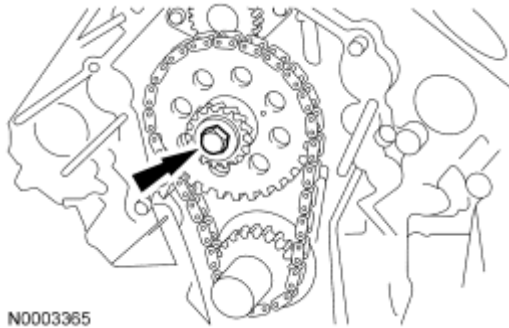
Locating Camshaft Synchronizer Drive Gear Bolt
